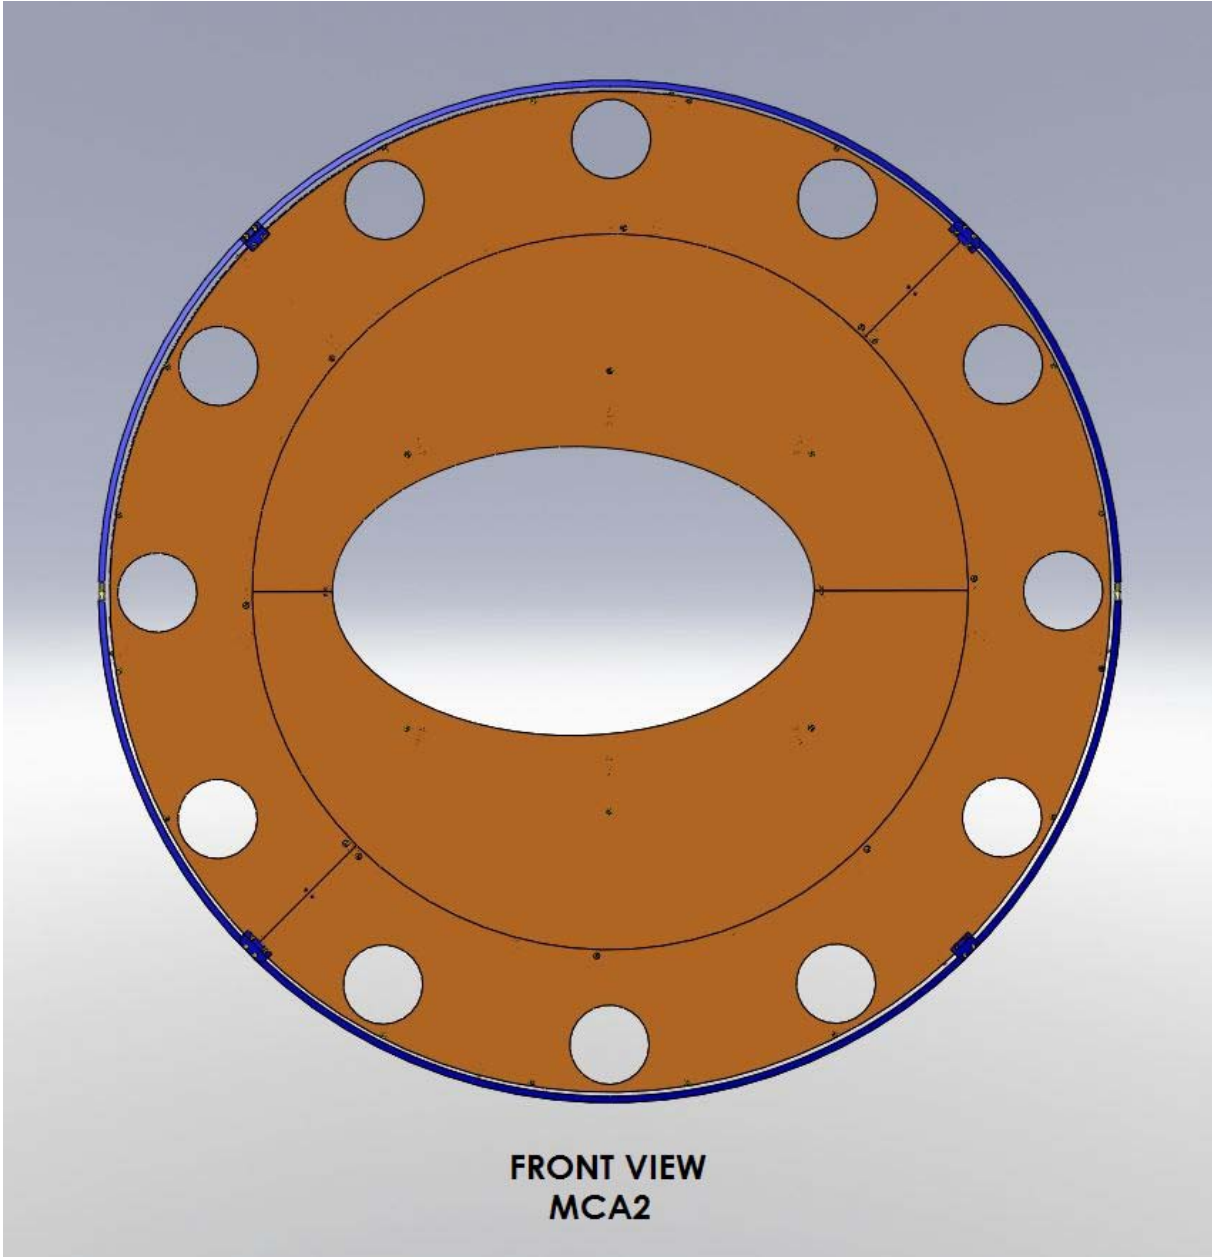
Front View of MCA2 Mode Cleaner Tube Baffle
